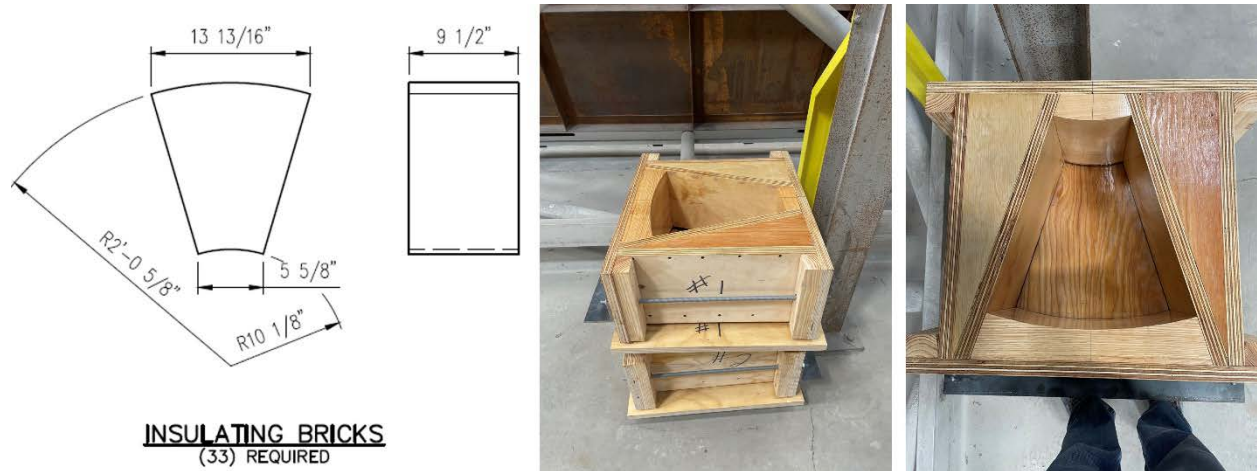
Insulation liner drawing of a geopolymer-lined prototype molten salt storage tank
